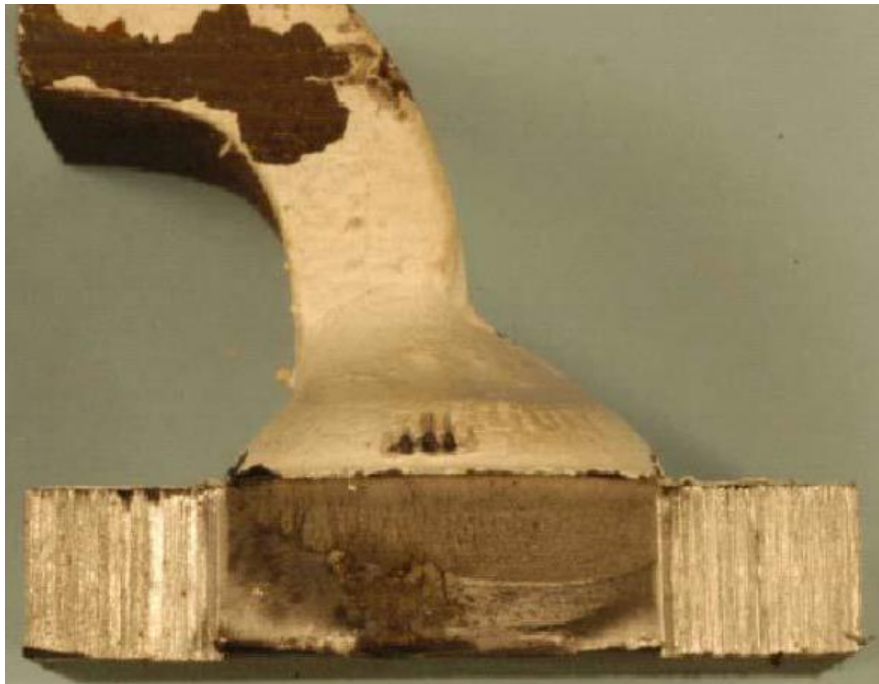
32: Crack profile in one of the experimental Complex tubular subjected to torsion and bending loading (JD)
